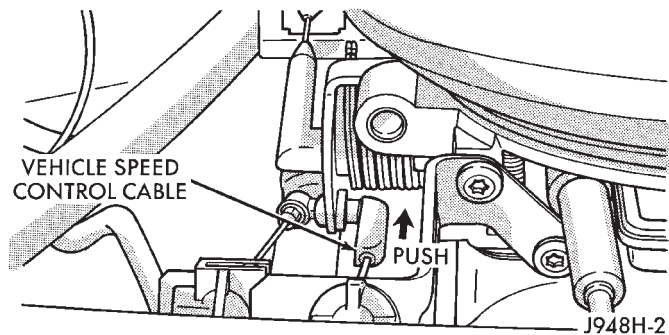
Cable at Bell Crank—5.2L/5.9LV-8 Engines
